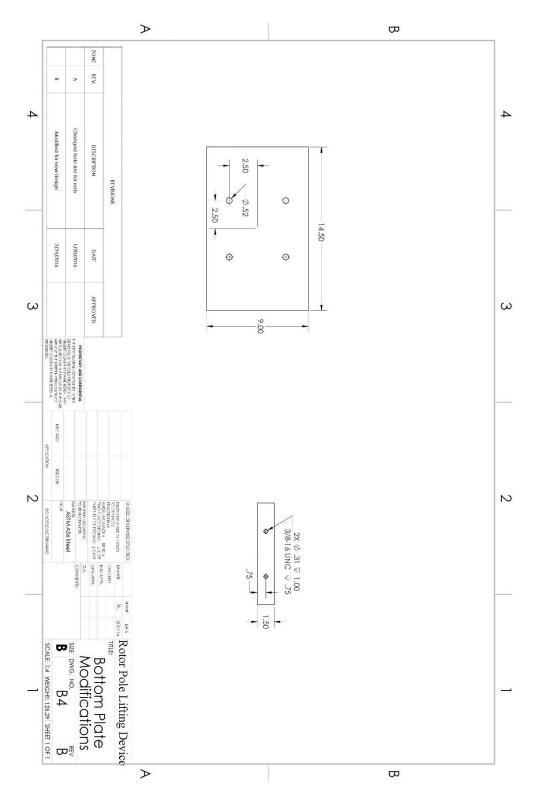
DRAWING OF LIFTING DEVICE BOTTOM PLATE
